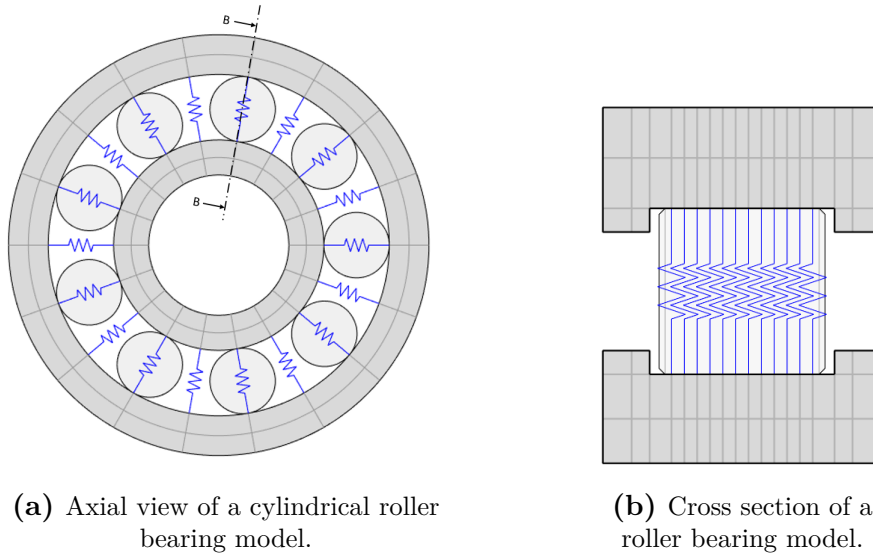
A cylindrical bearing model from Lincoln. Inner and outer rings are connected by springs.
